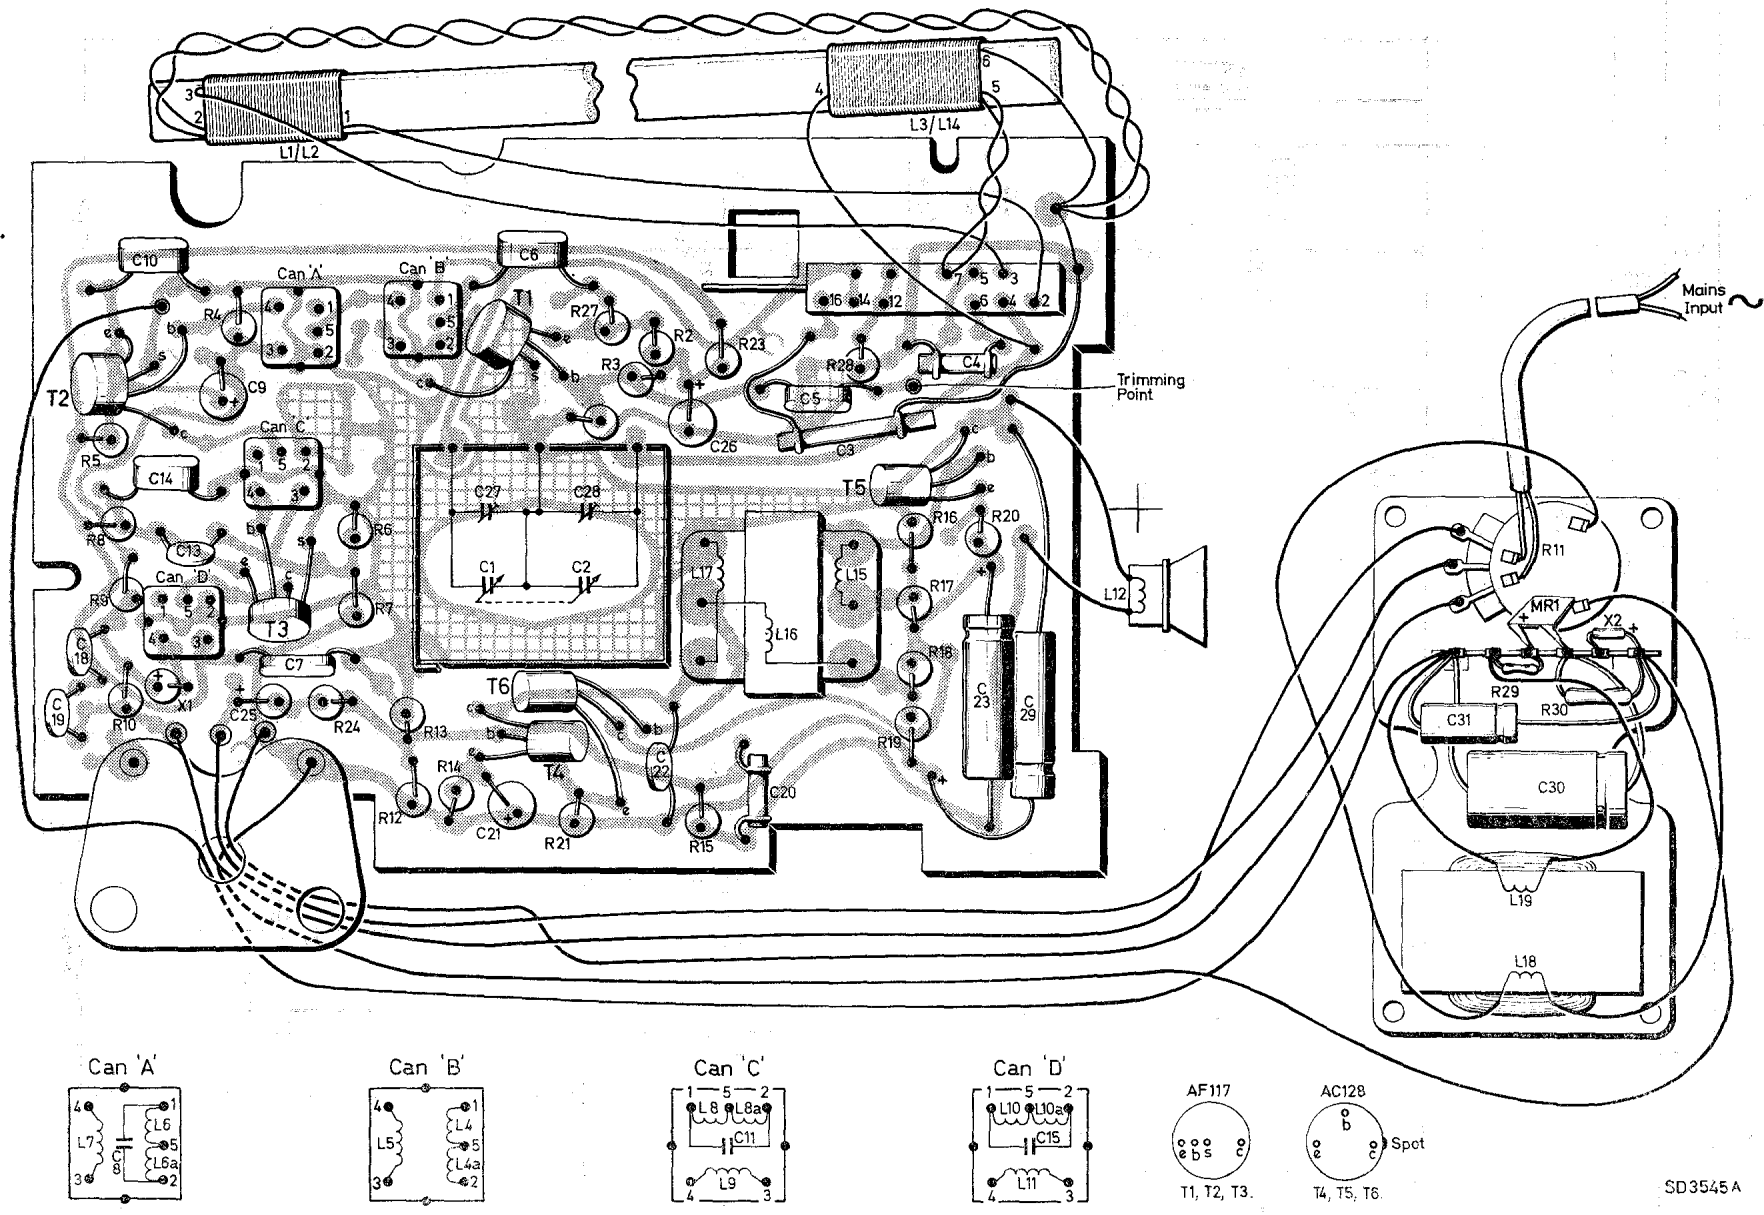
PRINTED PANEL and WIRING DIAGRAM
